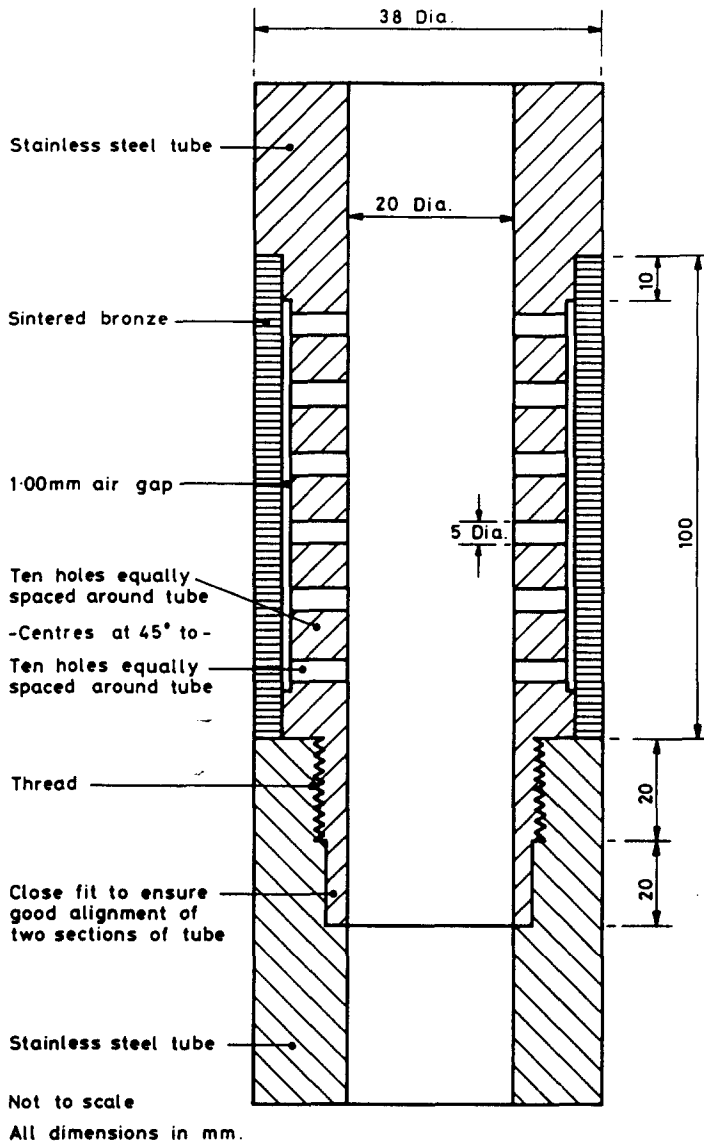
Section through stainless steel tube illustrating the water film removal sinter section.
